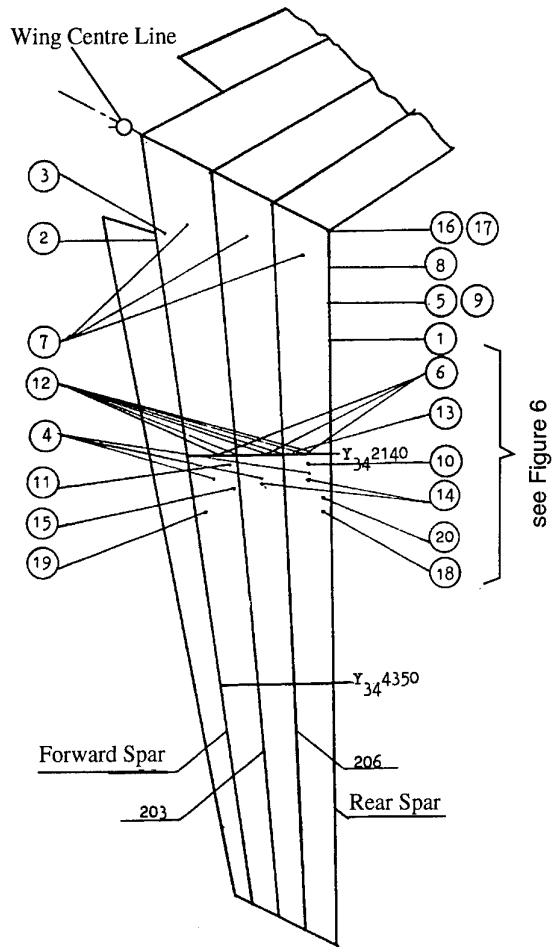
Type of fatigue cracks at the end of the fatigue test.
